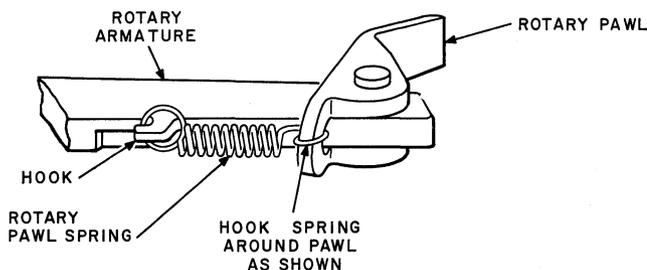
Method of Attaching Pawl Spring to Rotary Armature Pawl
